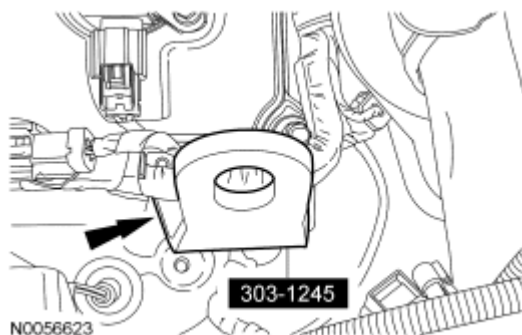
Special Tool (303-1245) On LH Cylinder Head
